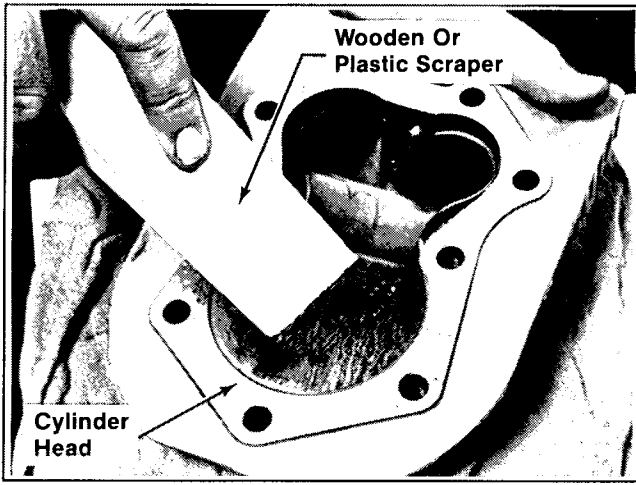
Cleaning Cylinder Head And Combustion Chamber.
